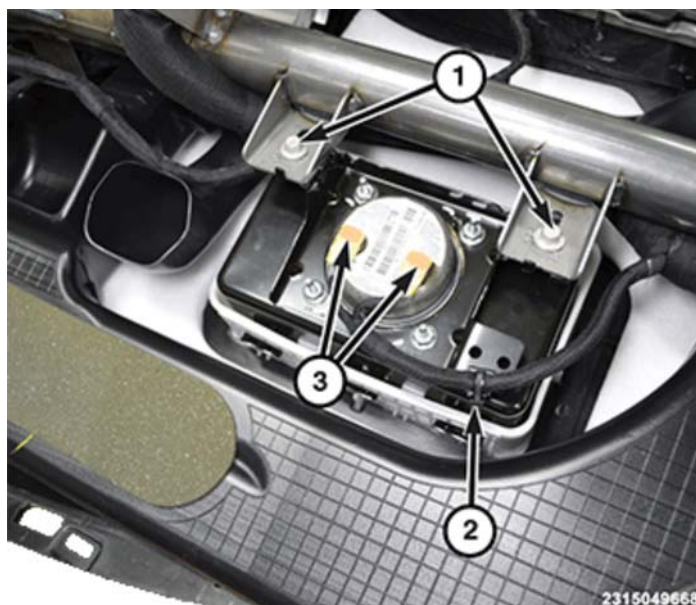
Passenger Airbag Bolts, Wire Harness & Connectors
